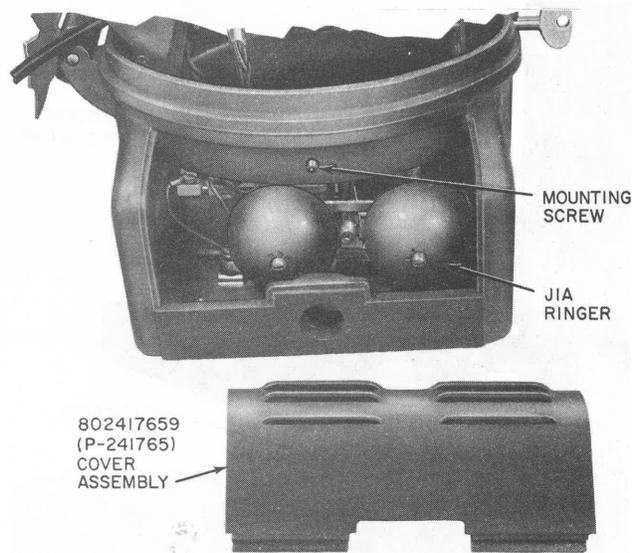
525-Type (MD) Telephone Set, Cover Assembly Removed
